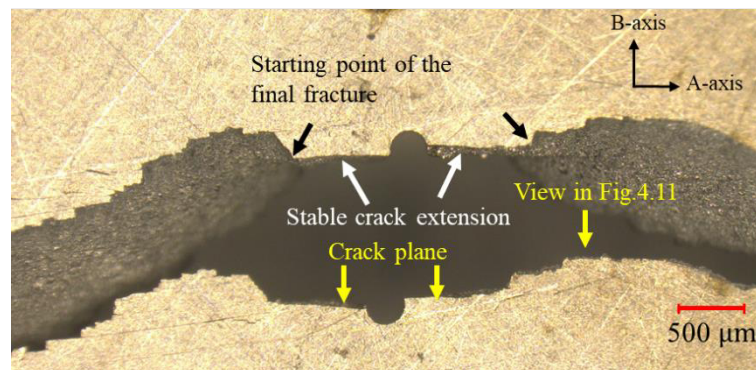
View of the specimen surface of the fractured biaxial specimen C2.
